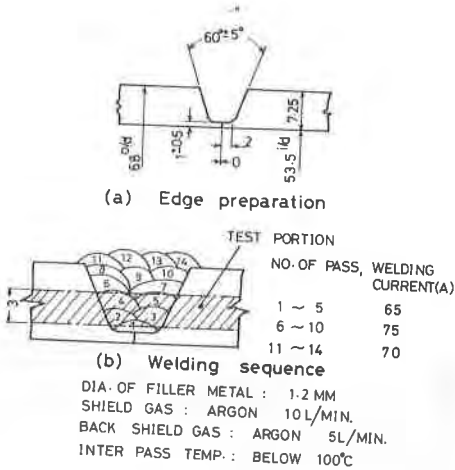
Welding procedure of Hastelloy X cylinder joint.
